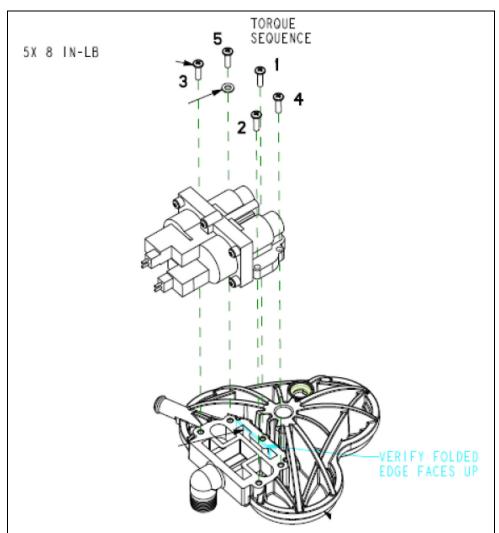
VALVE SOLENOID ASSEMBLY REMOVAL/INSTALLATION
